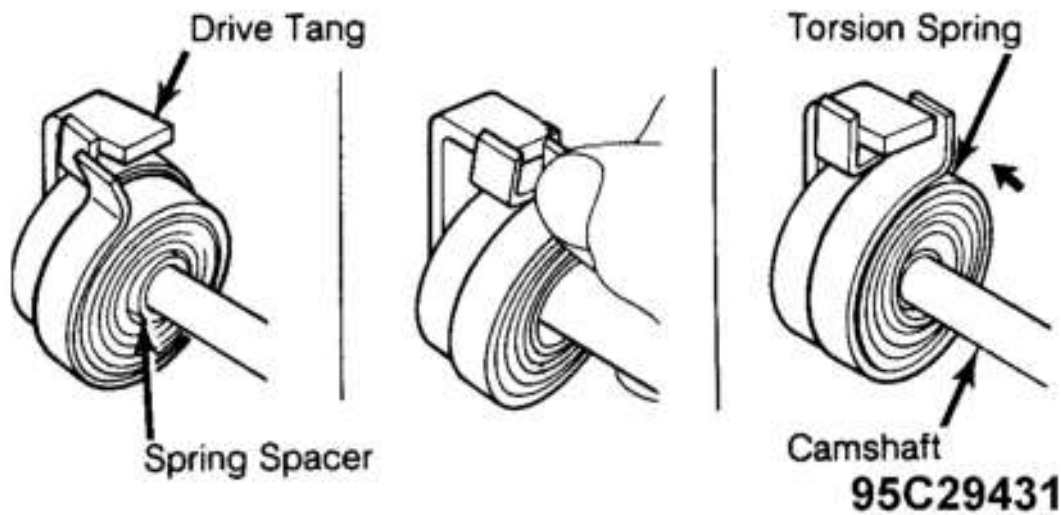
Attaching Spring Tangs to Camshaft Tangs
